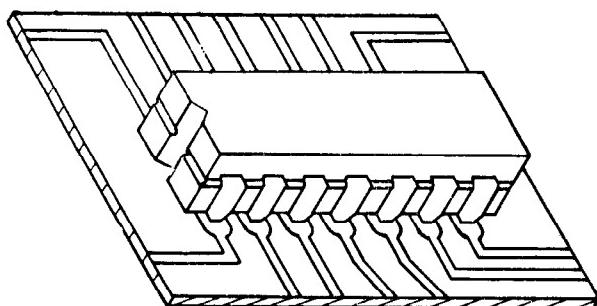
DUAL-IN-LINE PACKAGES — MOUNTED THROUGH THE BOARD
